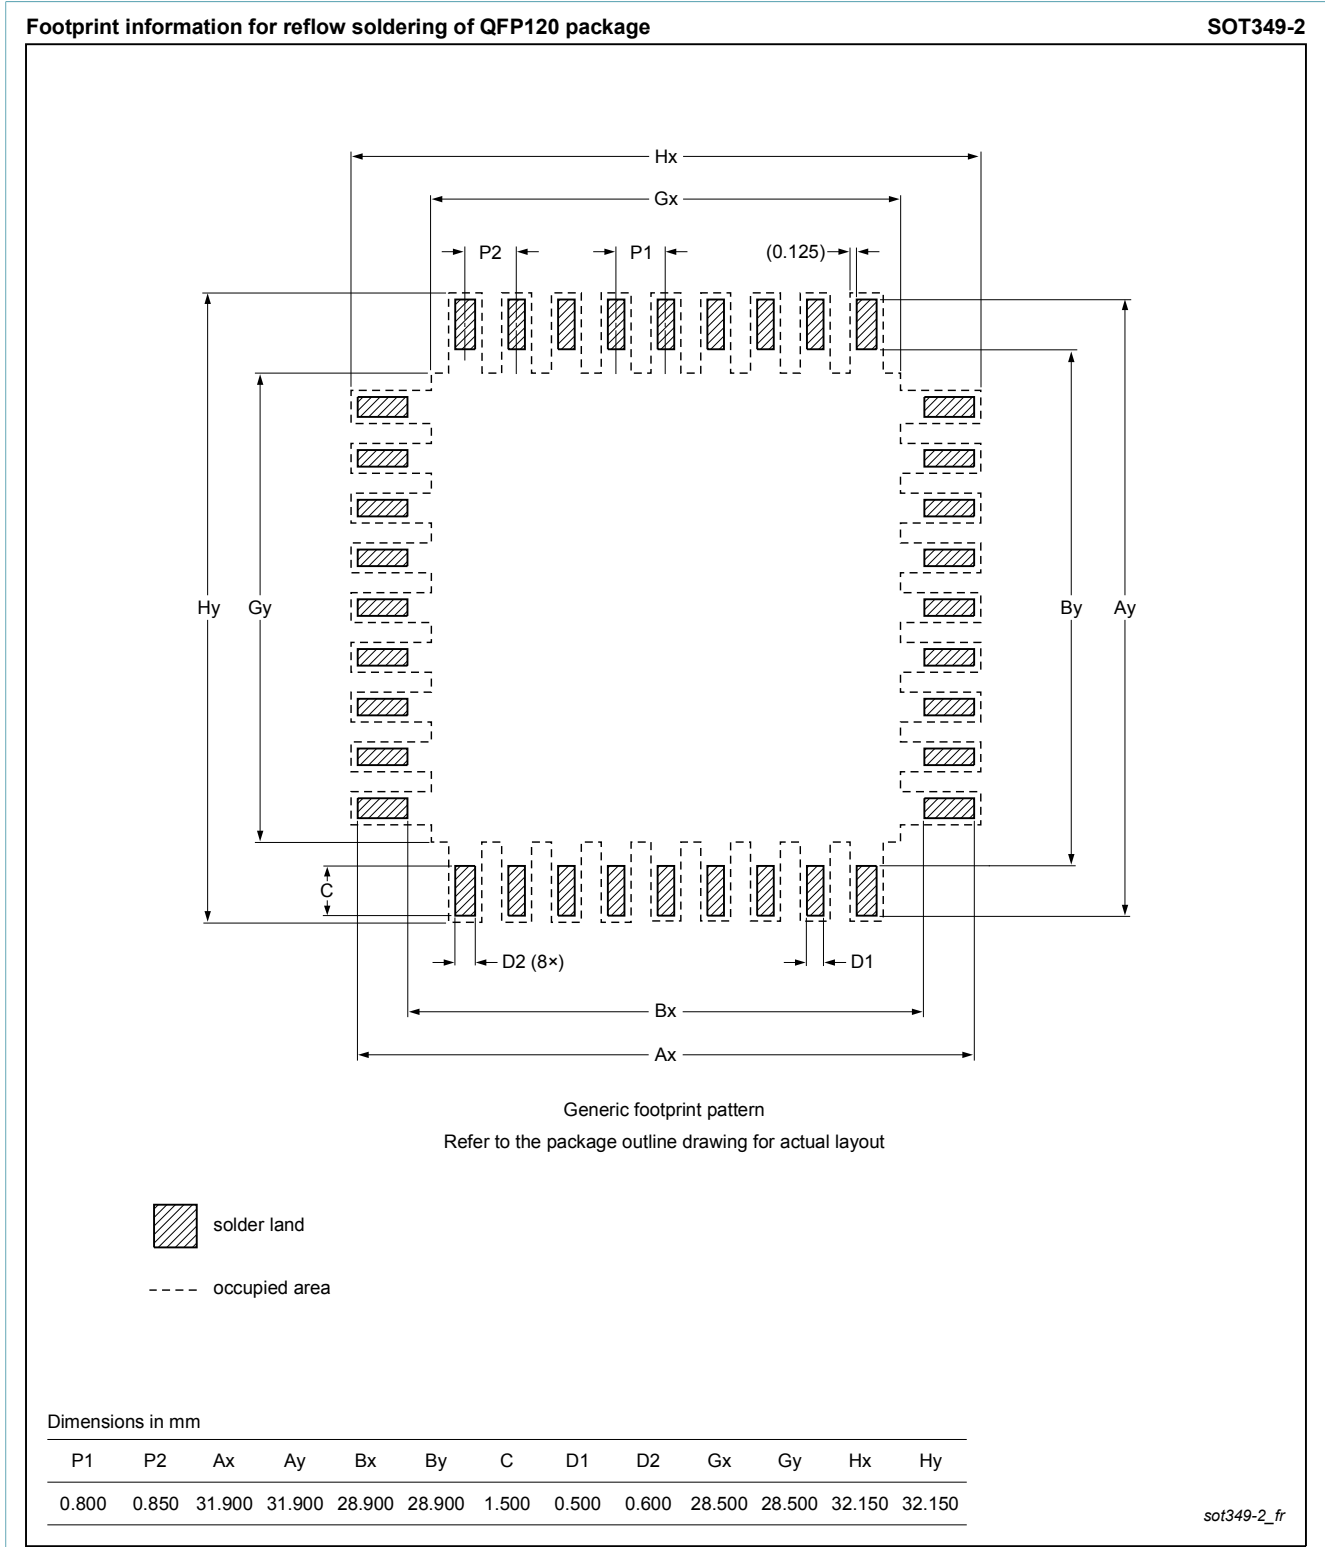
Reflow soldering footprint for QFP120 (SOT349-2)
